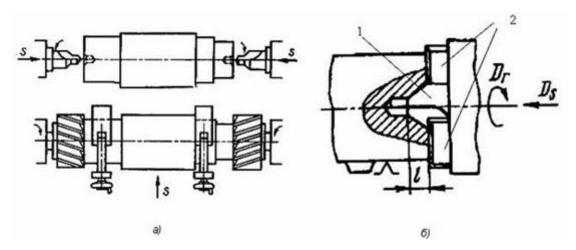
Circuits for machining center openings: a - on a milling center machine; b - with the use of the end cutting tool; 1 - drill bit; 2 - cutters
